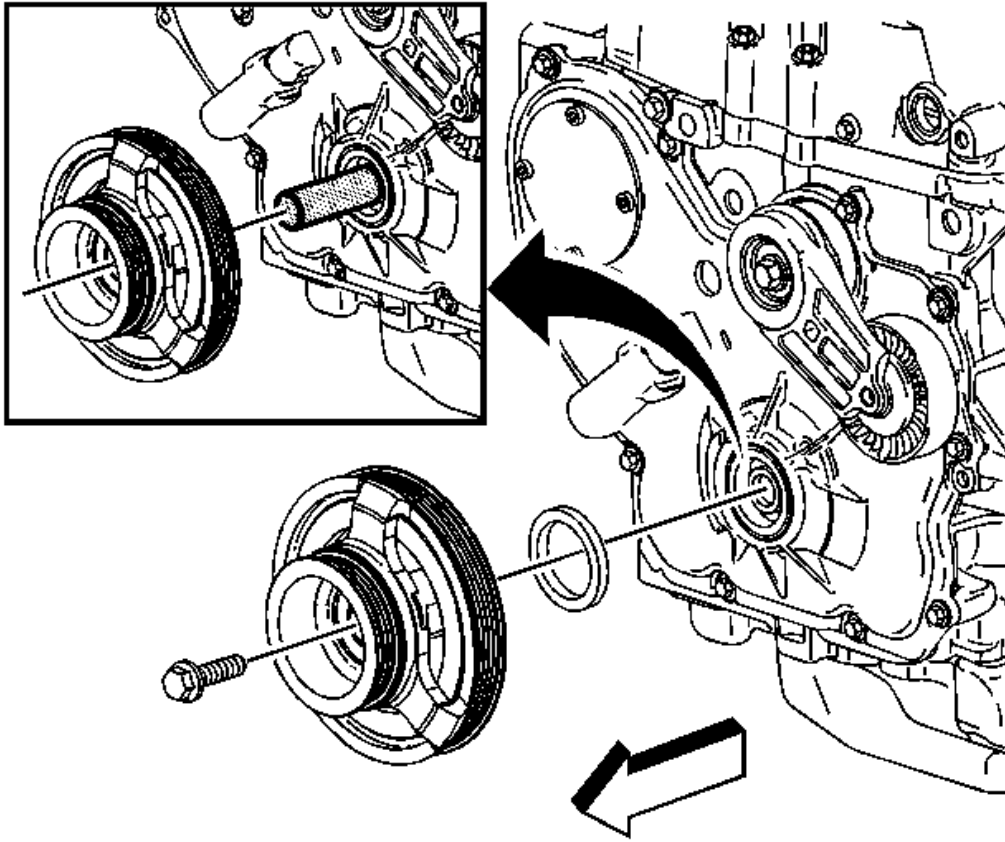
View Of Crankshaft Balancer, Bolt & Washer
